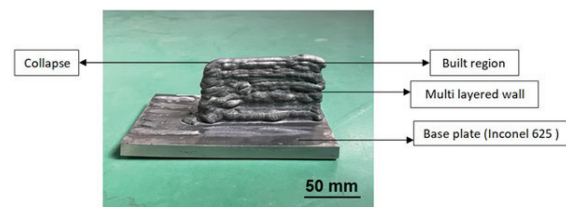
Image of WAAM printed Inconel 625 Multilayer wall structure
